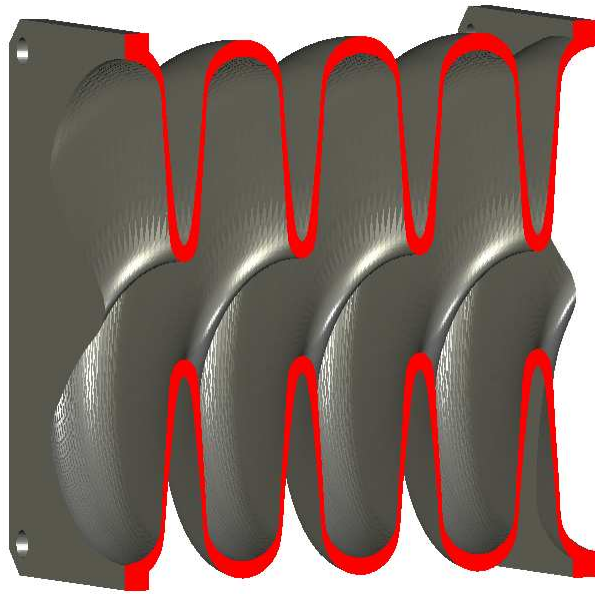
Longitudinal cross section of twisted TESLA-type cavity.
